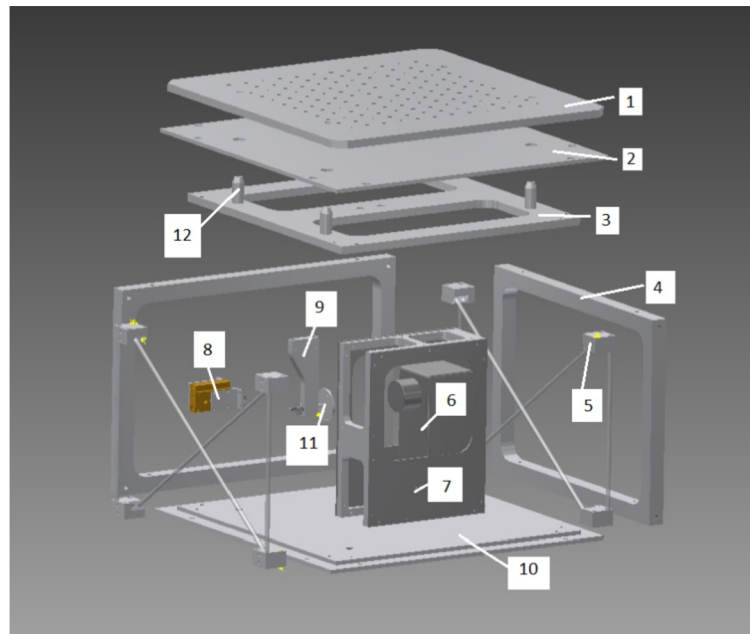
Assembly sketch of the main components of the DEP device. The eddy current brake not shown here. Parts: 1 thruster platform; 2 housing top plate; 3 upper moving platform; 4 housing frame; 5 flexible bearing rod assembly; 6 weigh cell; 7 weigh cell supporting frame; 8 calibration stage assembly; 9 Force transmission piece with screw; 10 base plate; 11 contact piece; 12 connection stud to thruster platform
